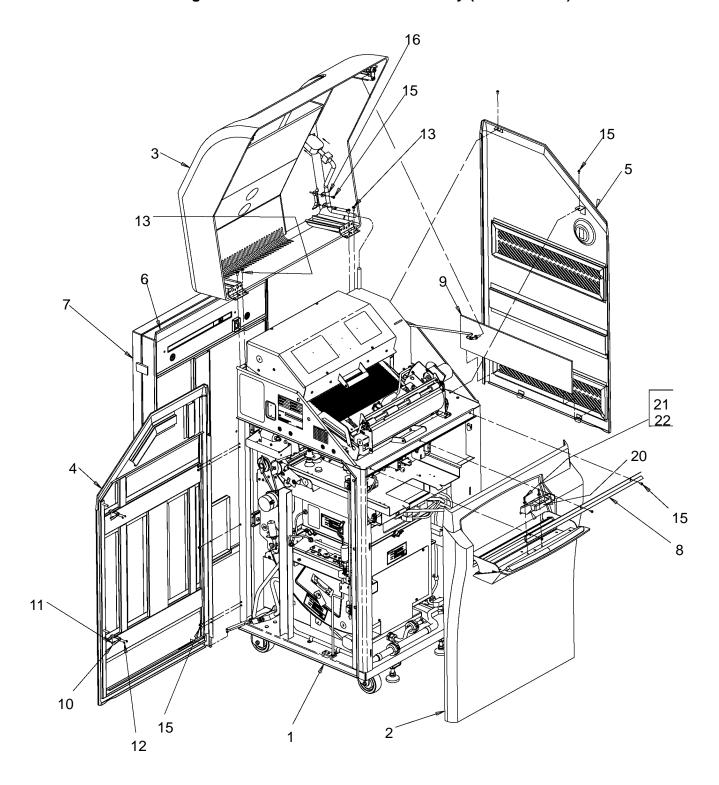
Machine and Skins Assembly (Screen 1 of 2)
